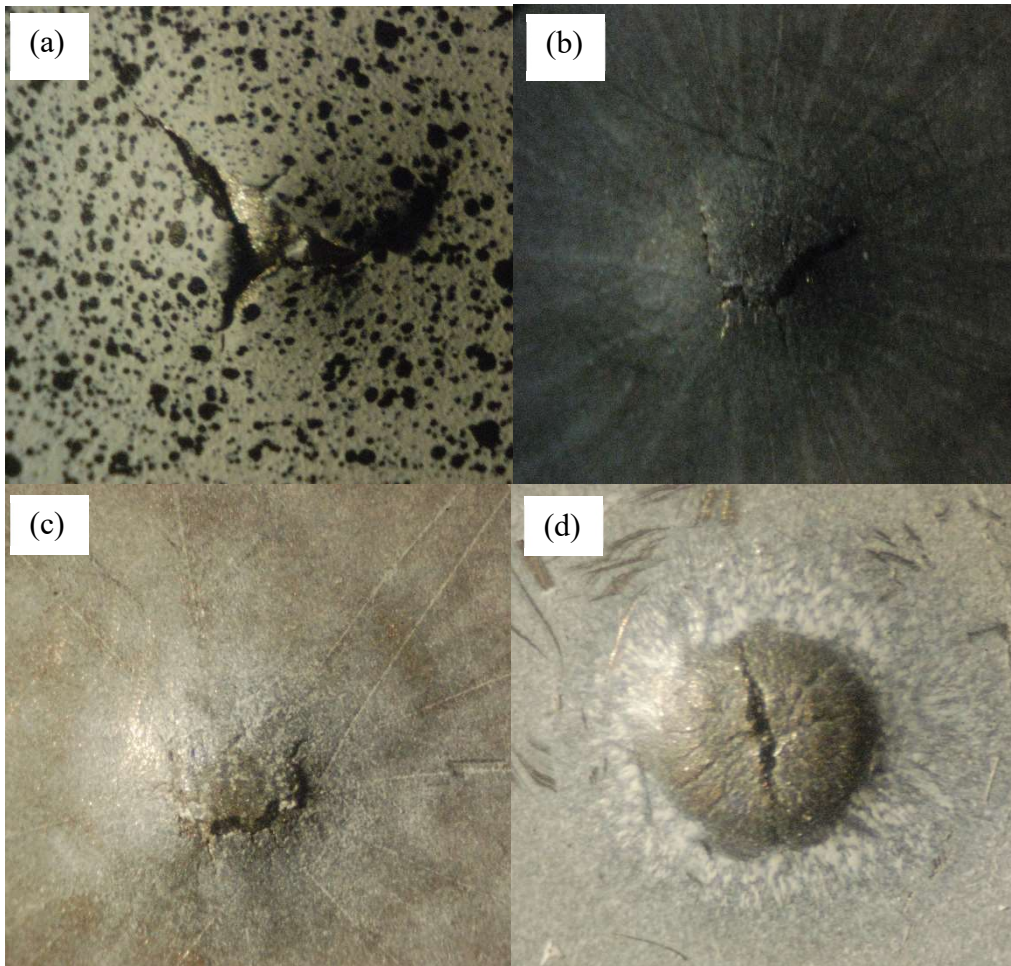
Post-test Ti64 punch test specimens showing fracture locations for (a) unbacked, (b) 0.889 mm backing plate, (c) 1.27 mm backing plate and (d) 1.83 mm backing plate
